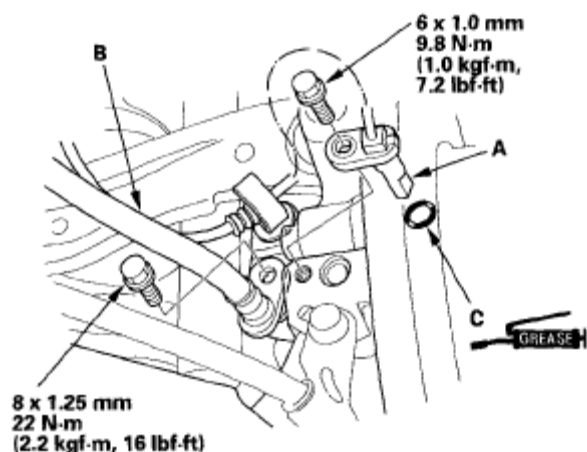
Identifying Wheel Sensor And Brake Hose (With Torque Specifications)
